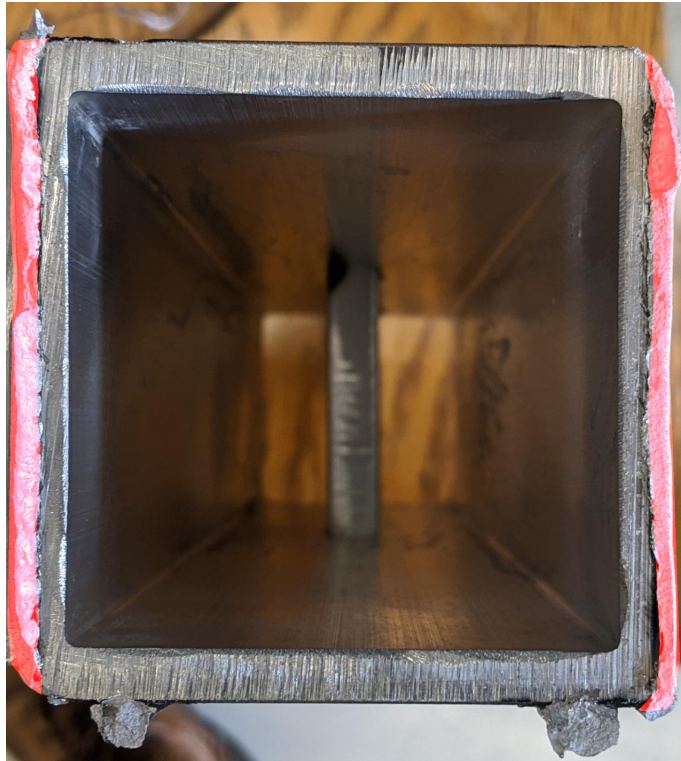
A failed tubular sample with the weld area highlighted in red, which was measured to find the true weld size. The two tack-welds at the bottom were not considered in the area calculation.
